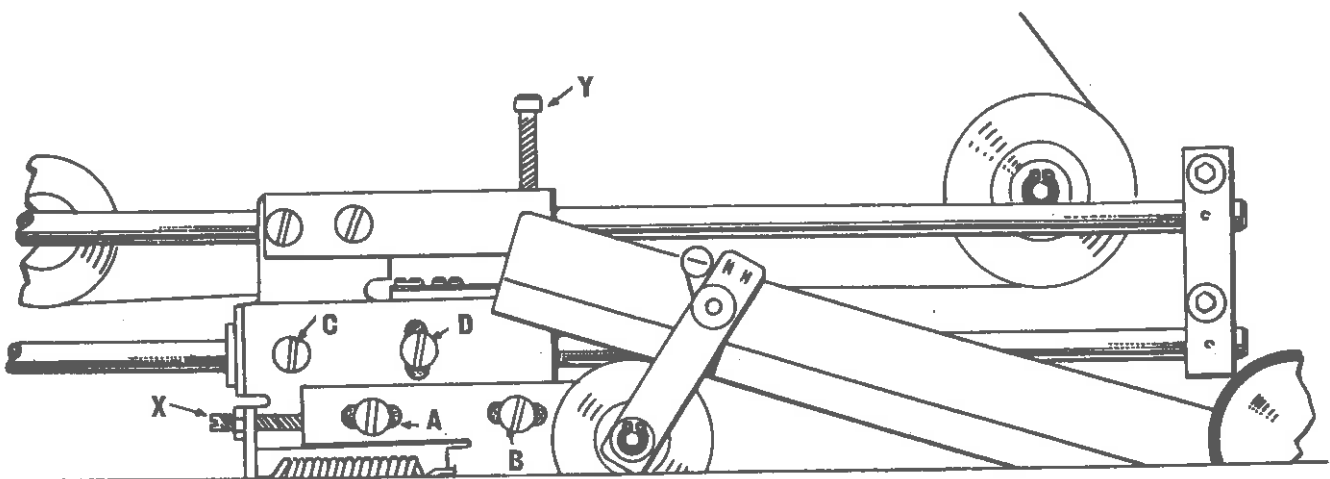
Cosecant Carriage (Showing Adjustment Screws)
